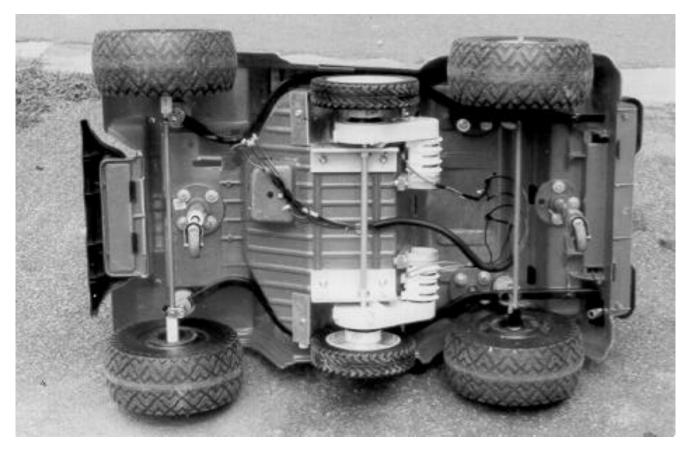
Bottom view of the Toddler Motorized Jeep.
